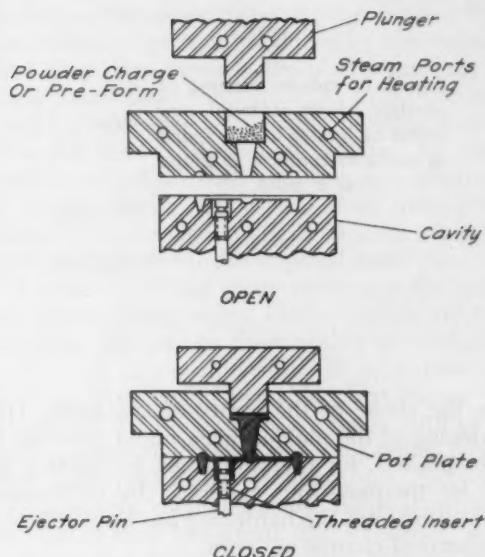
Plastic material is preheated dielectrically or by steam for transfer molding. Close-tolerance parts can be produced.
